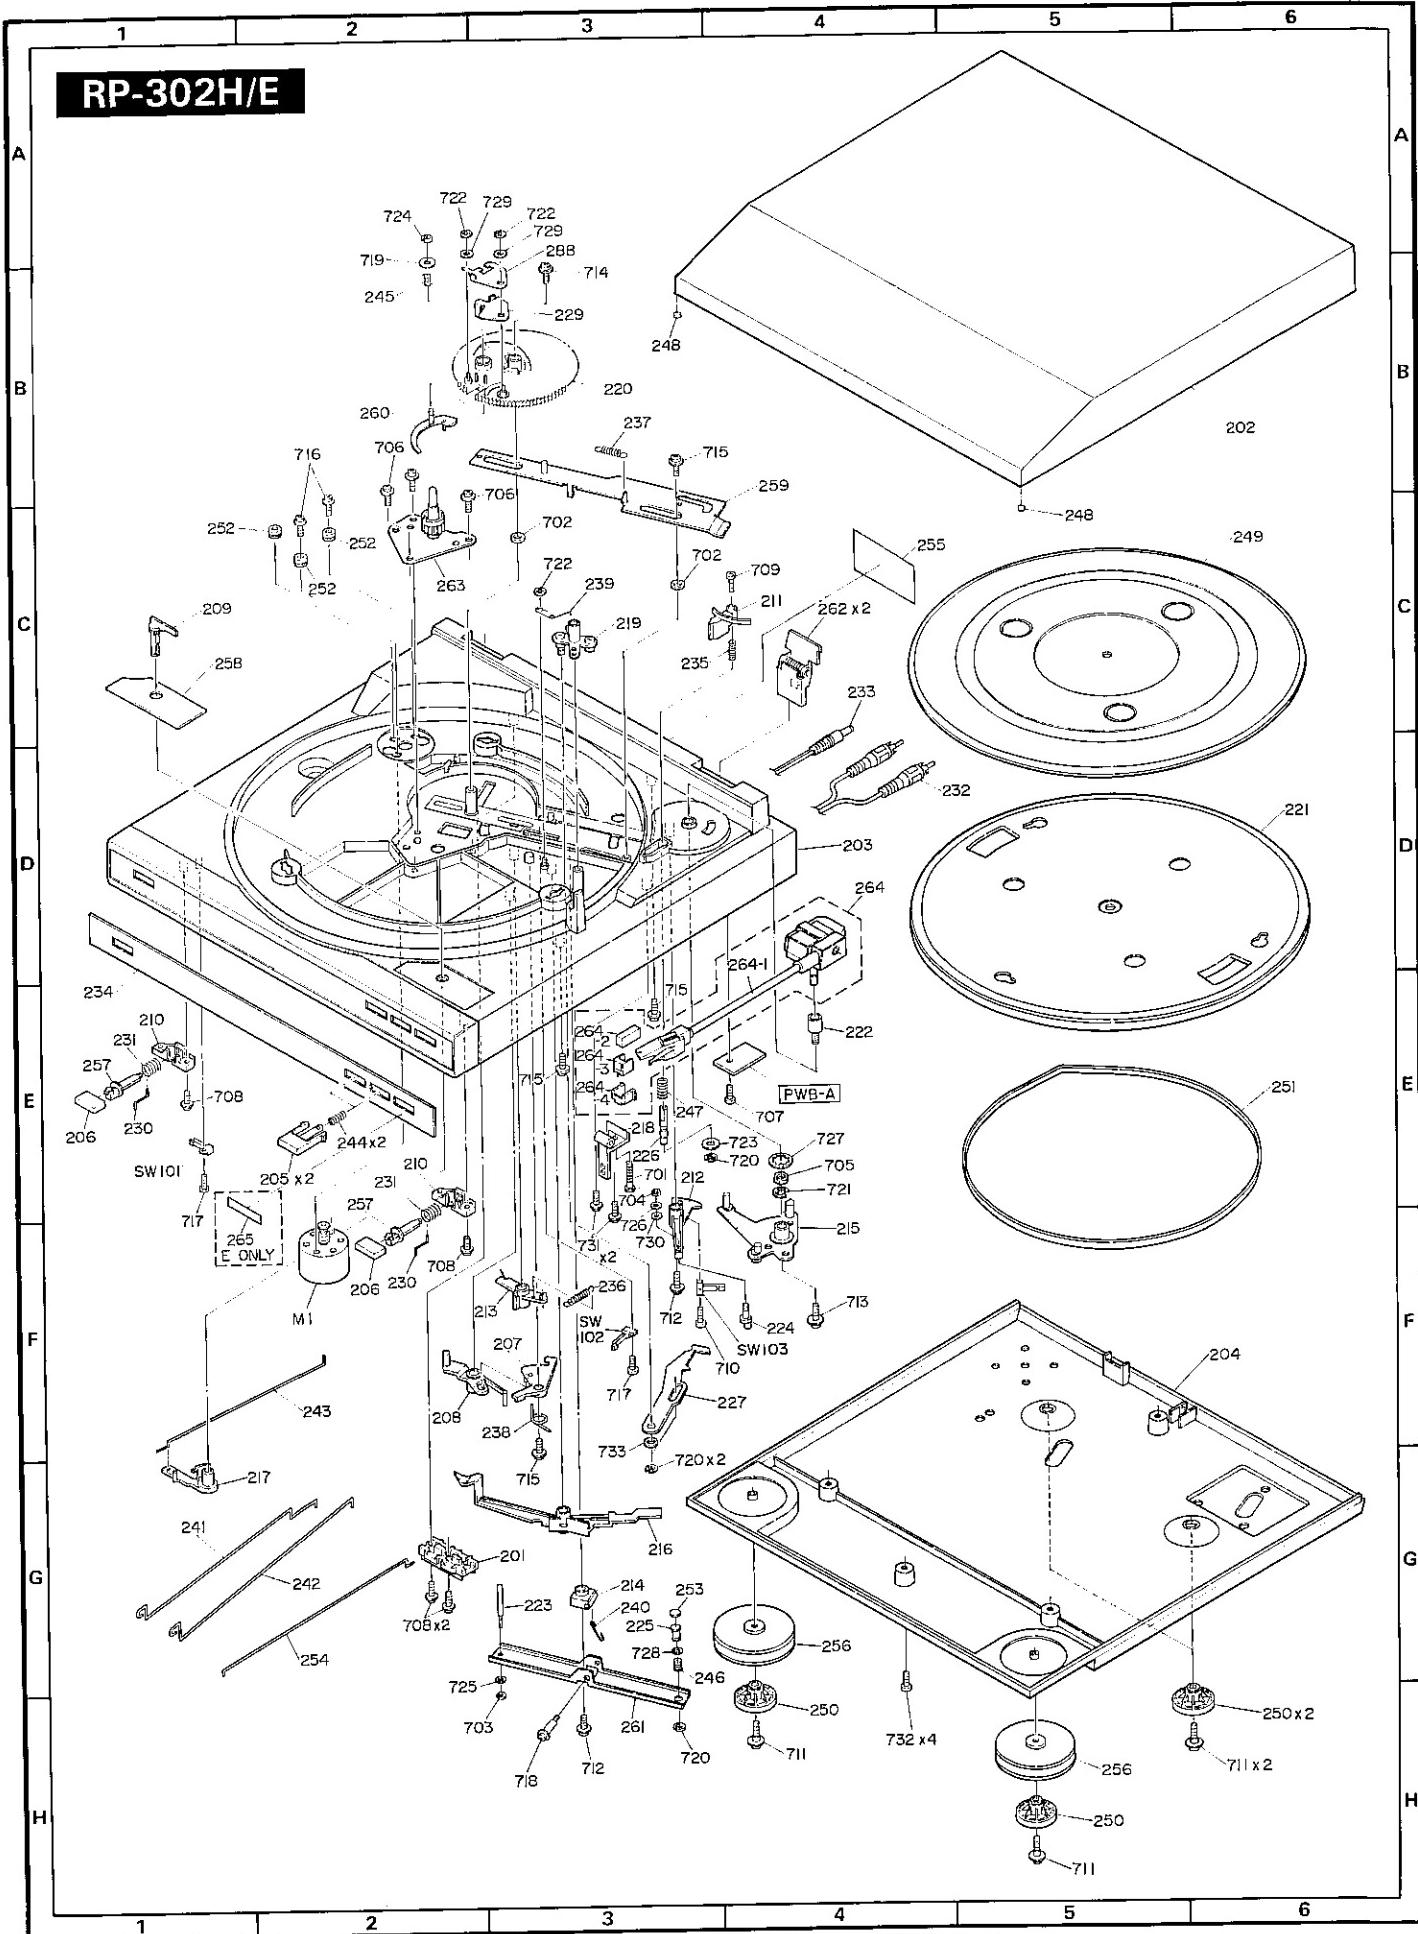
PLAYER MECHANISM EXPLODED VIEW
